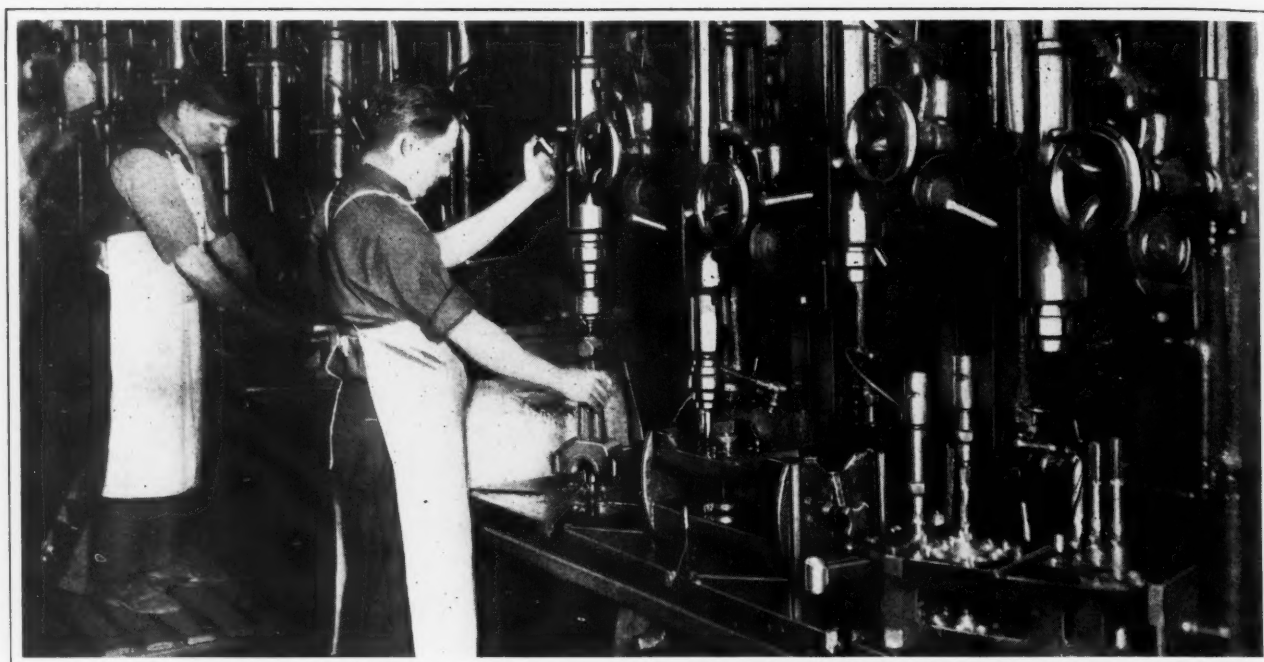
Gang of Drills and Fixtures Used in Drilling Operations on Connecting-rods
